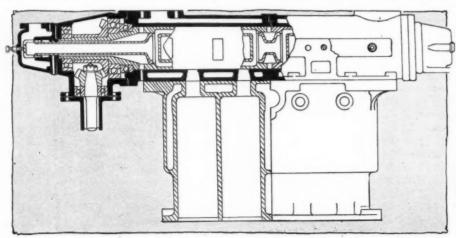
Sectional view of Castiglione and Bolton rotary-valve motor
